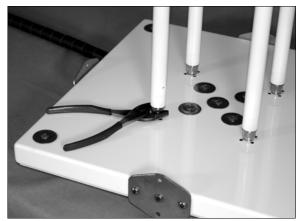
Installing the Sleeve-Dipole Main Assembly on the Main Chassis
